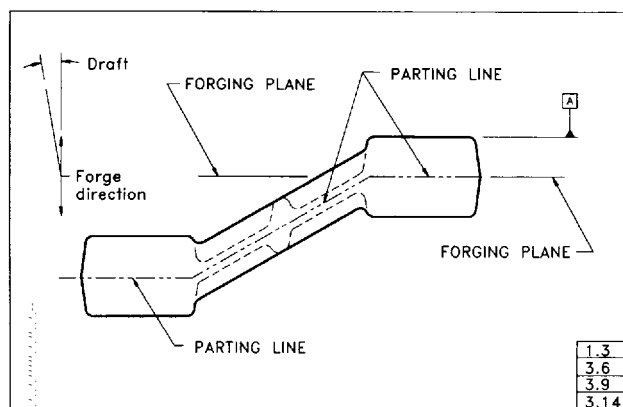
(a) DATUM PLANE AND FORGING PLANE PARALLEL
